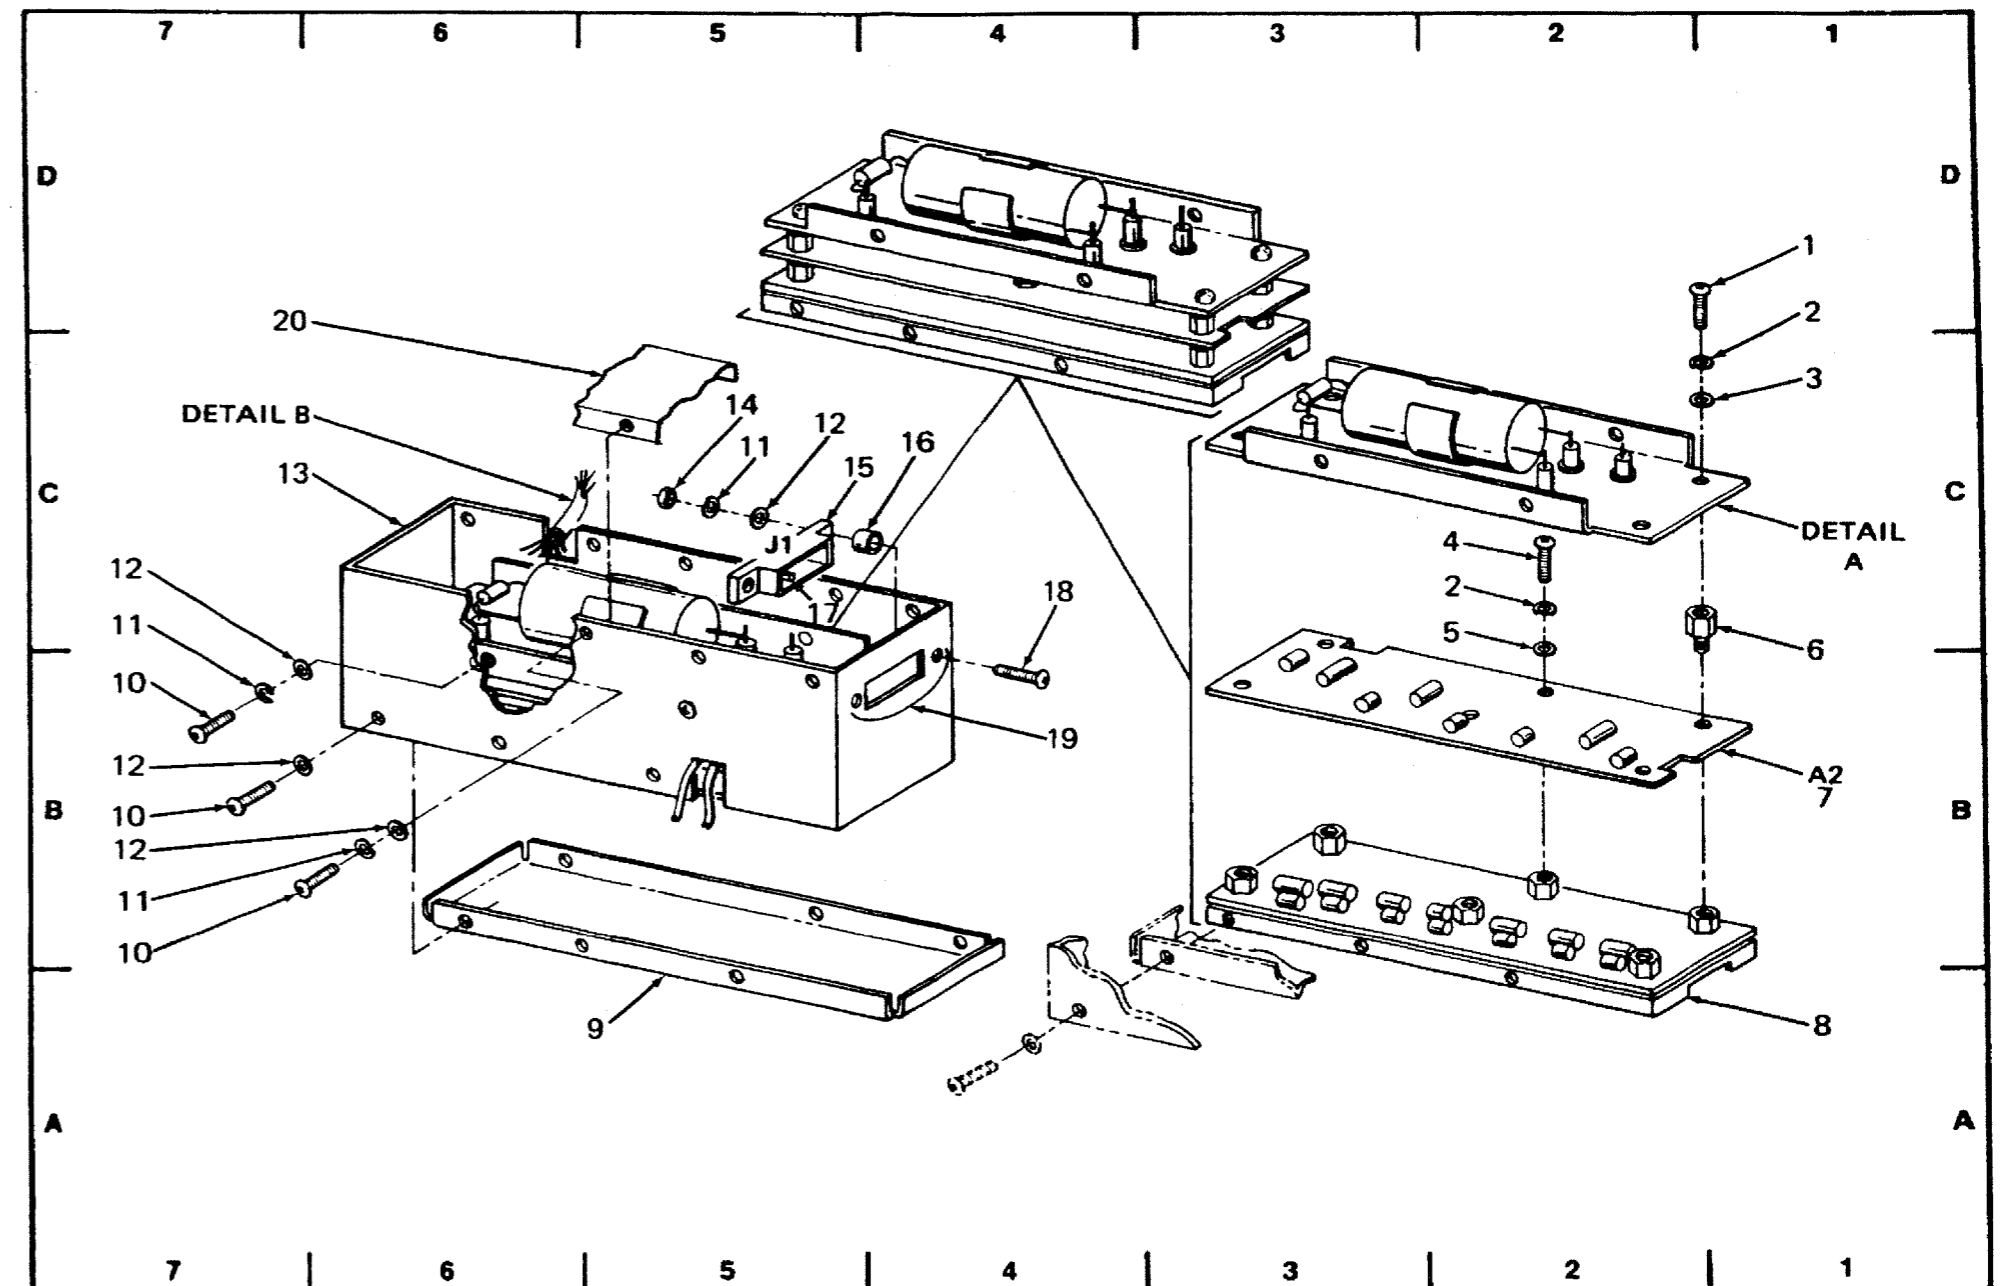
Pin Driver Module Assembly (Sheet 1 of 2)
